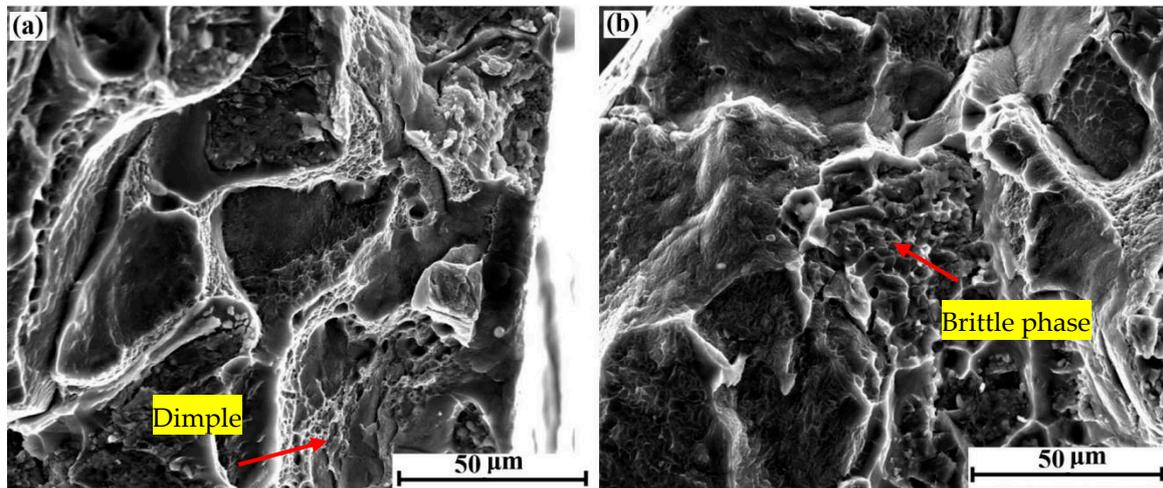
Tensile fracture morphology of 7085 specimen in atmosphere: (a) The edge area of fracture and (b) The heart area of fracture.
